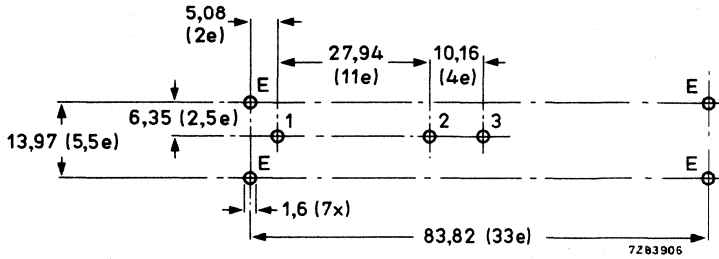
Piercing diagram viewed from solder side of board;  $e = 2,54 \text{ mm}$  (0,1 in).
